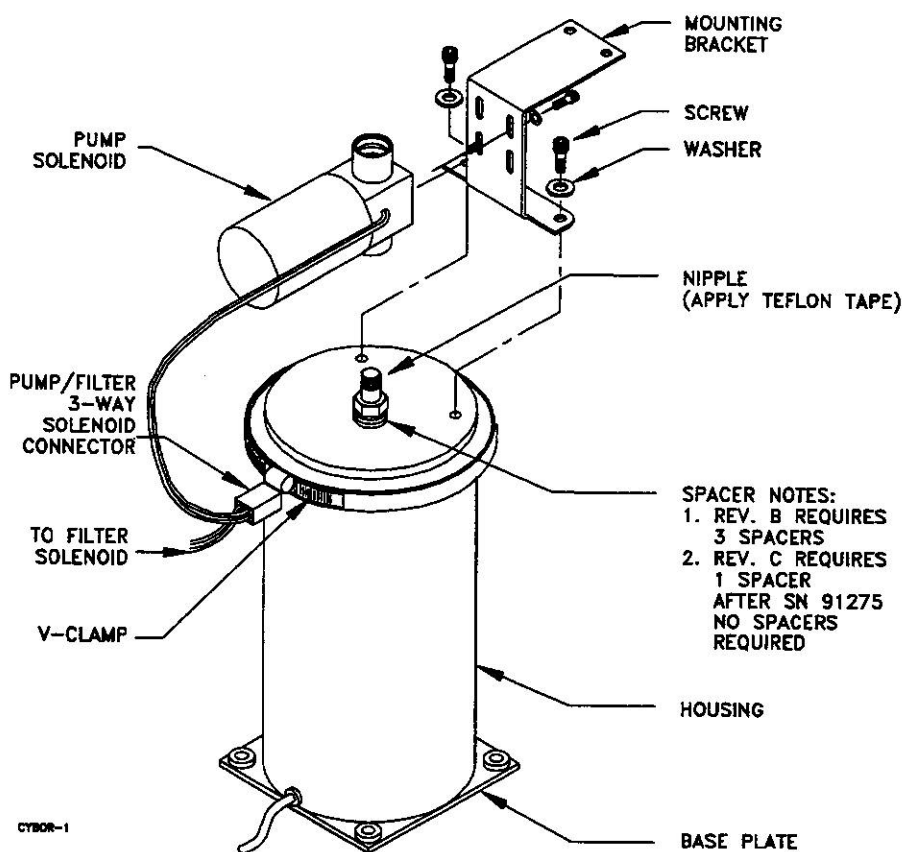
Pump 3-Way Solenoid Valve Removal and Replacement
